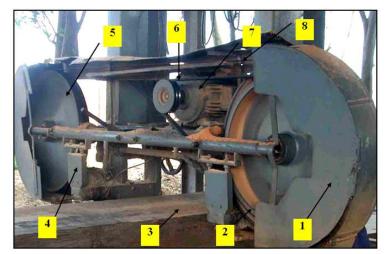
The general structure of the HLBS machine in the sawmill 1- Wheel cover bracket. 2- Driving wheel. 3- Wood log. 4- Guide section. 5- Driven wheel. 6- Belt driver. 7- Motor. 8- Bandsaw blade
